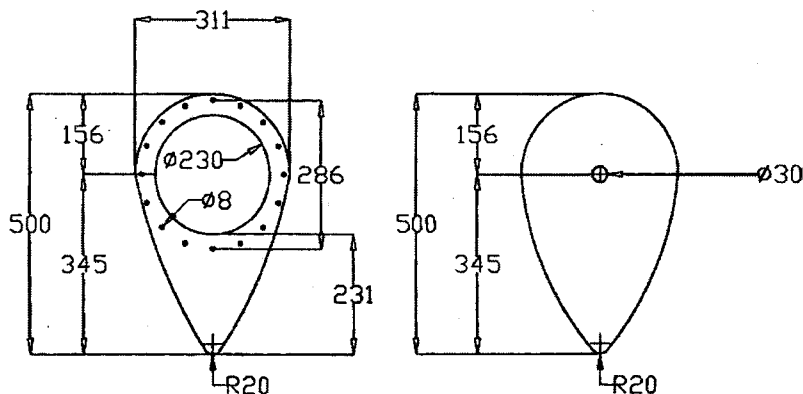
Plane view of the frame design of the free mount-and-detach ADCP system.
